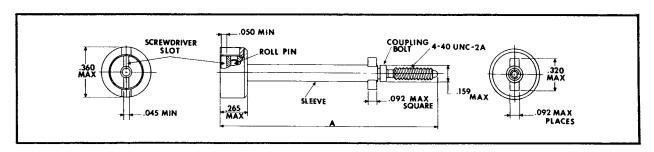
10-299822 Hold Down and Removal Accessory
